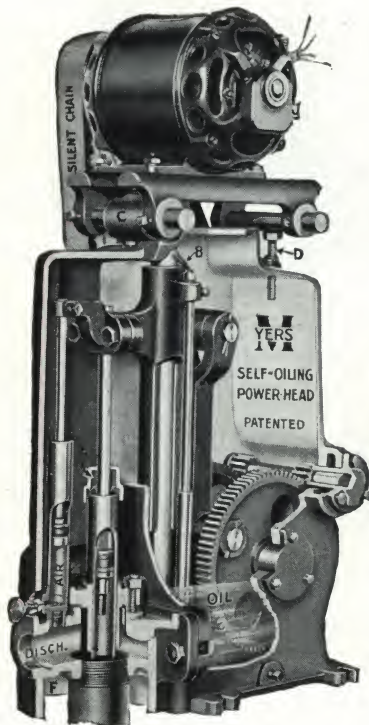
Sectional View of Deep Well Self-Oiling Power Pump
